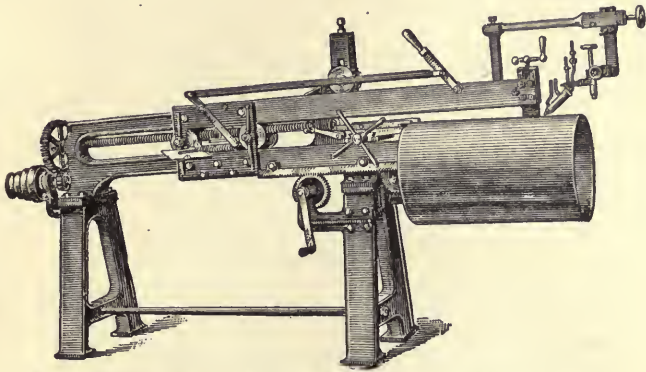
Machine for welding cylindrical bodies (Bastian type).
